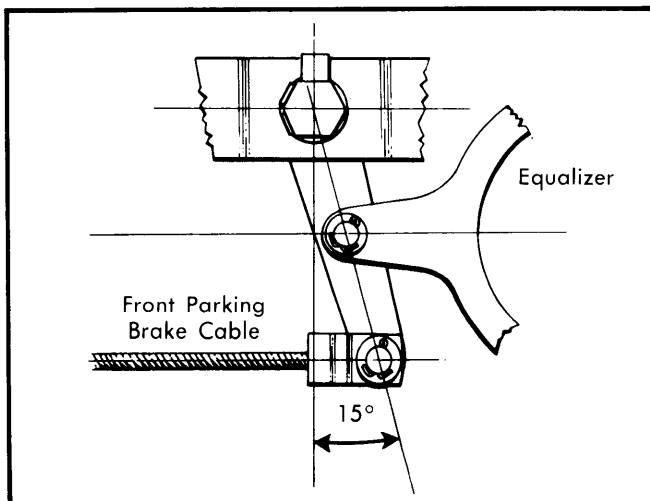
Positioning Spitfire Front Parking Brake Cable and Equalizer for Parking Brake Adjustment
